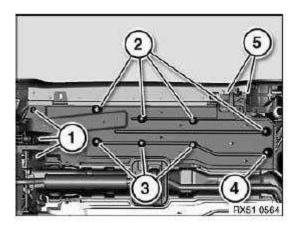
Identifying Plastic Nuts And Expander Rivets Courtesy of BMW OF NORTH AMERICA, INC.
